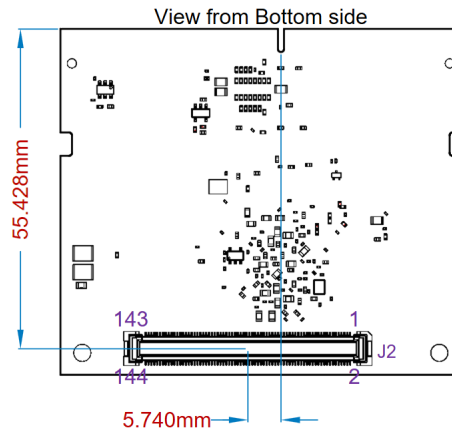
MitySOM-C10G Mechanical Outline, Bottom Side View
